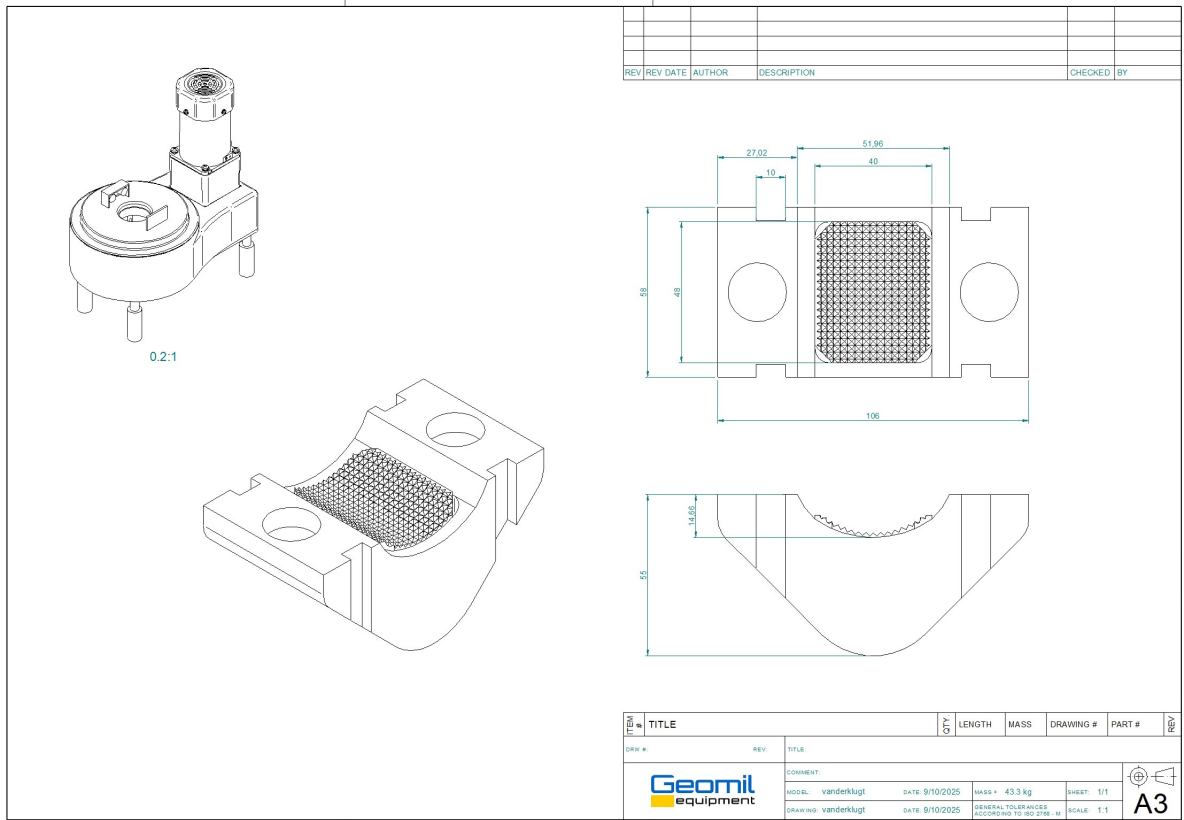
Technical Drawing Of The Clamping Blocks Of The Raptor.
